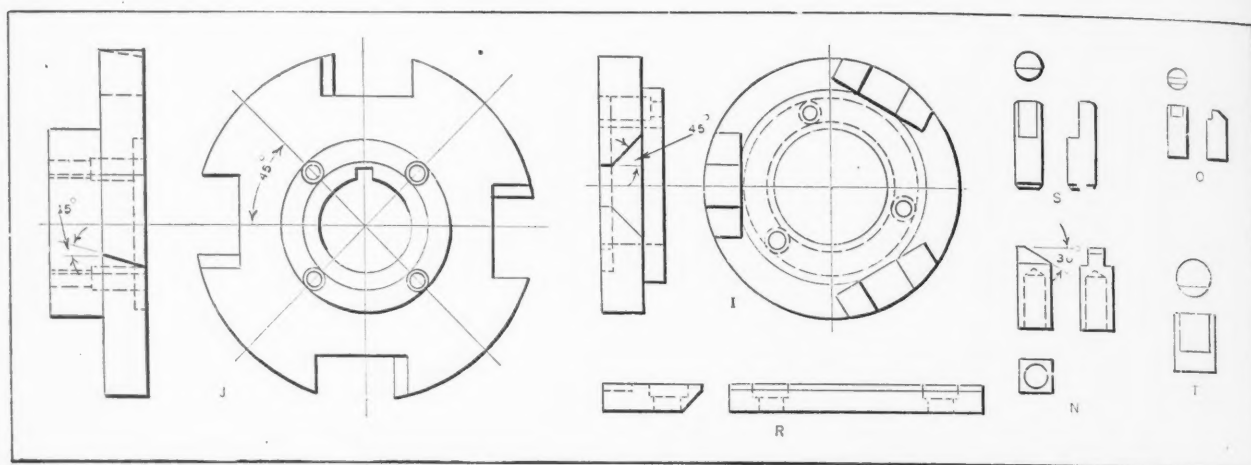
Some of the Parts of Fixture Shown in Figs. 1 and 2
